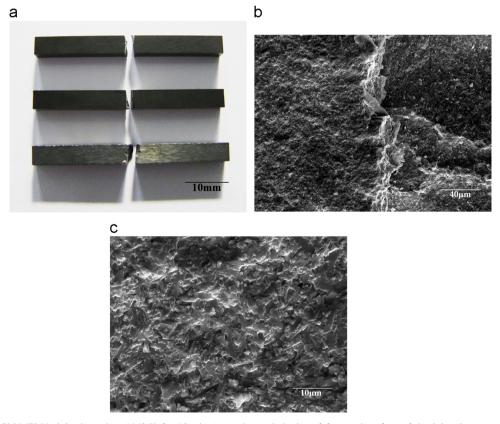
The fractured Si_3N_4/Si_3N_4 joint brazed at 1443 K for 10 min (a), and morphologies of fractured surface of the joint (low magnification (b) and high magnification (c)).
